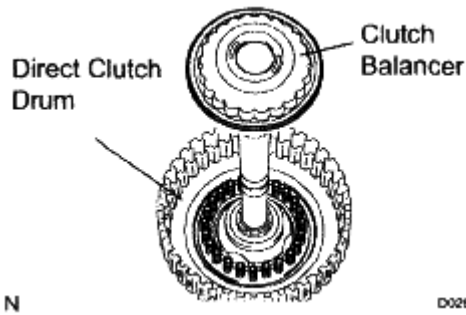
Identifying Clutch Balancer And Direct Clutch Drum
